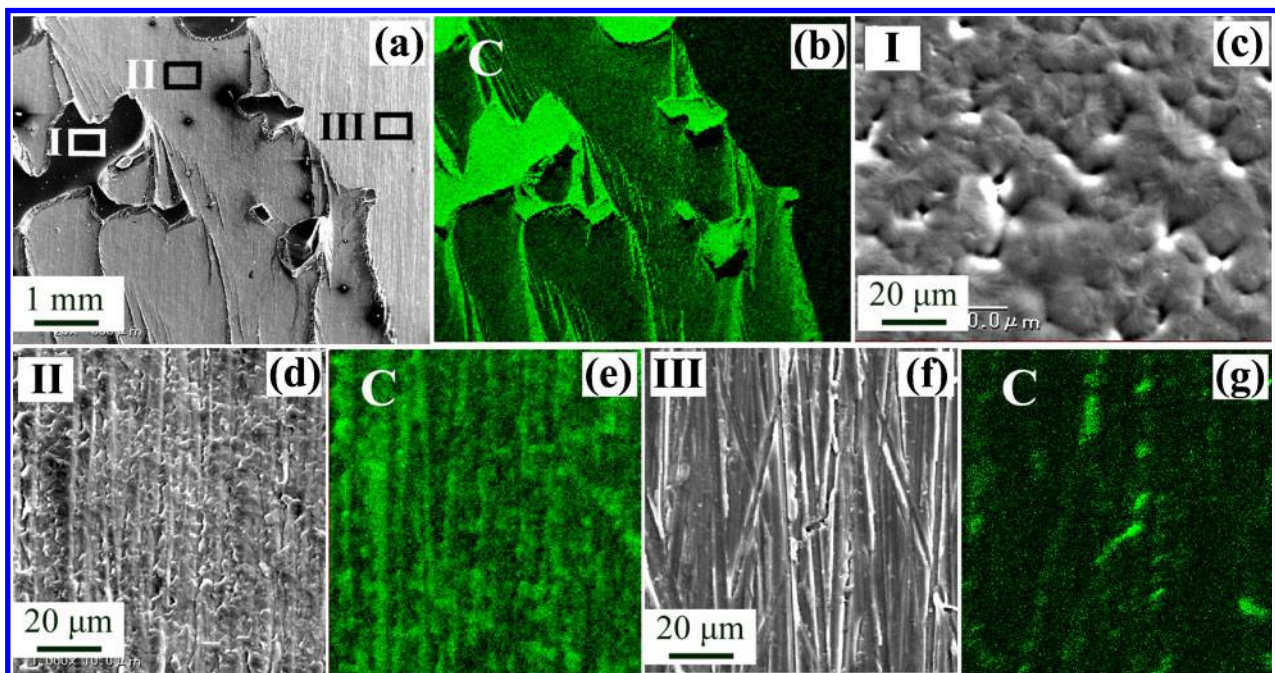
shows the morphology of bubbles observed on fracture surface of the joints made by parameters M2
